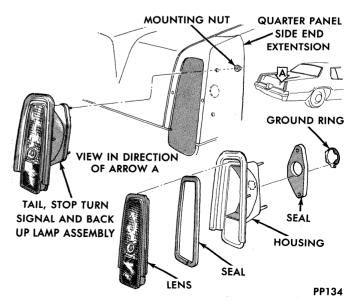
Tail, Stop, Turn Signal, and Back-Up Lamp— Carline R—2-Dr. HT
